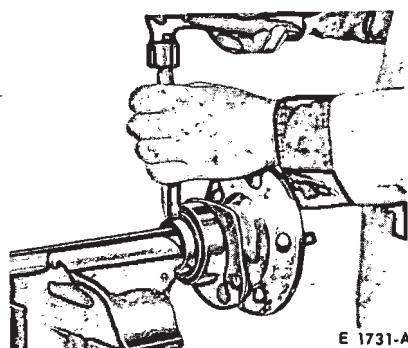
Removing Rear Wheel Bearing Retainer Ring
